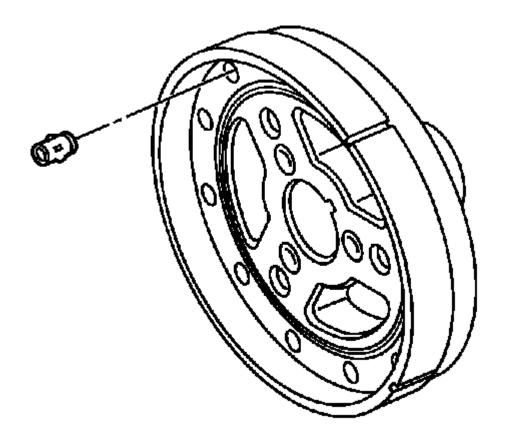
View Of Crankshaft Balancer Weights Courtesy of GENERAL MOTORS CORP.
